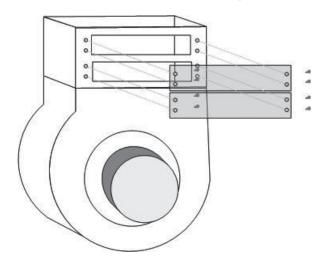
Showing Collar mounted on blower housing, element location and collar plate(s)
